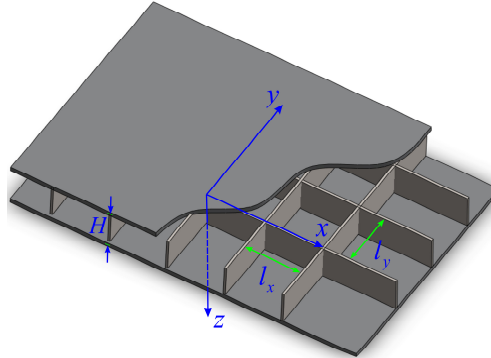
A typical sandwich structure with orthogonally rib-stiffened core
